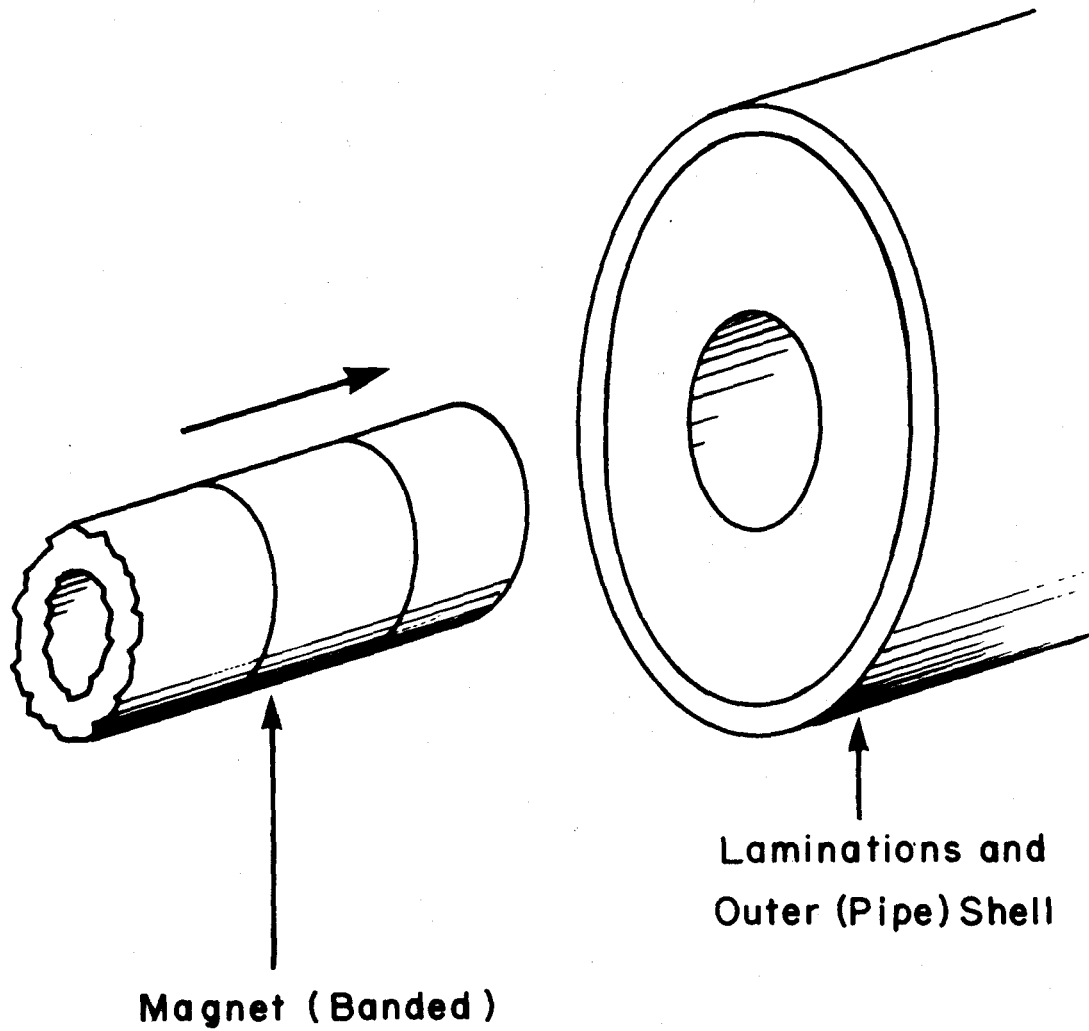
Magnet Assembly and Inner Shell Being Installed in Laminations and Outer (Pipe) Shell.
